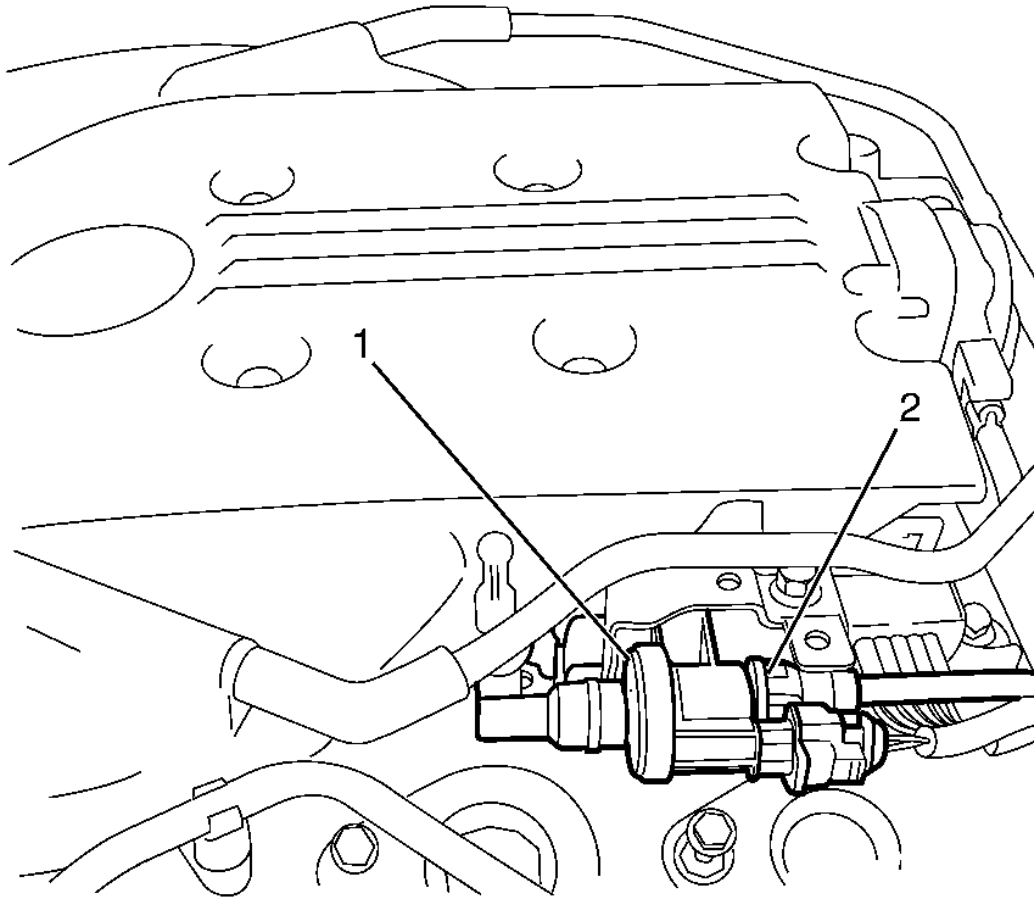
Identifying Brake Booster Vacuum Hose & Intake Manifold
